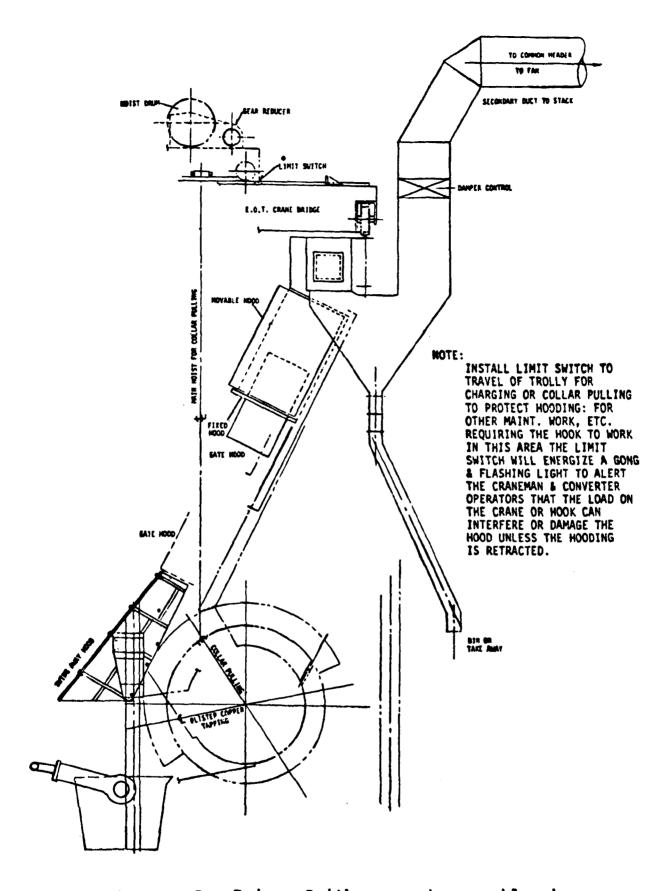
Peirce-Smith converter - side view, blister pouring operation, hooding extended.
